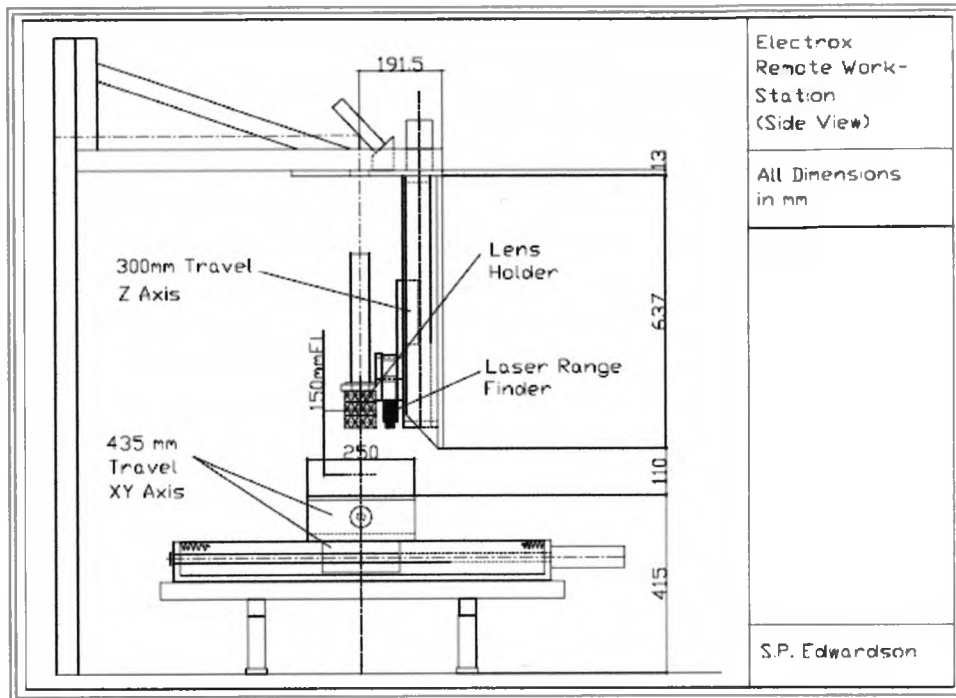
Workstation 2, CAD Drawing of layout⁴⁷
